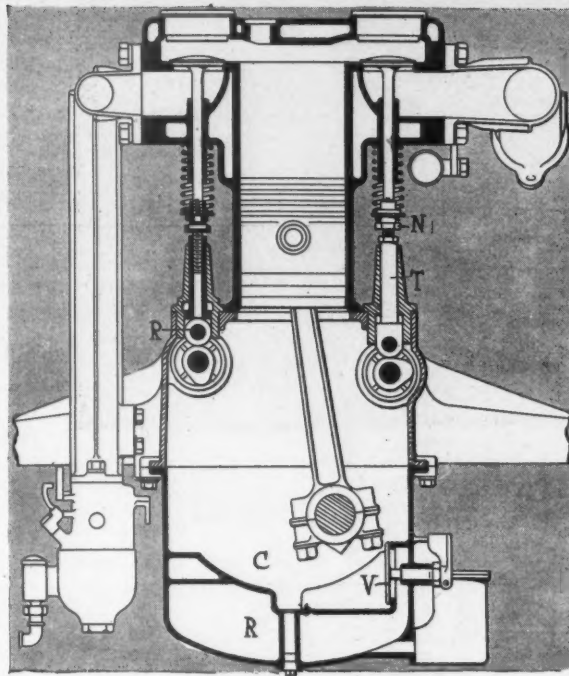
END SECTION OF PULLMAN T-HEAD MOTOR SHOWING THE TAPPET ROD DESIGN AND METHOD OF ADJUSTMENT
